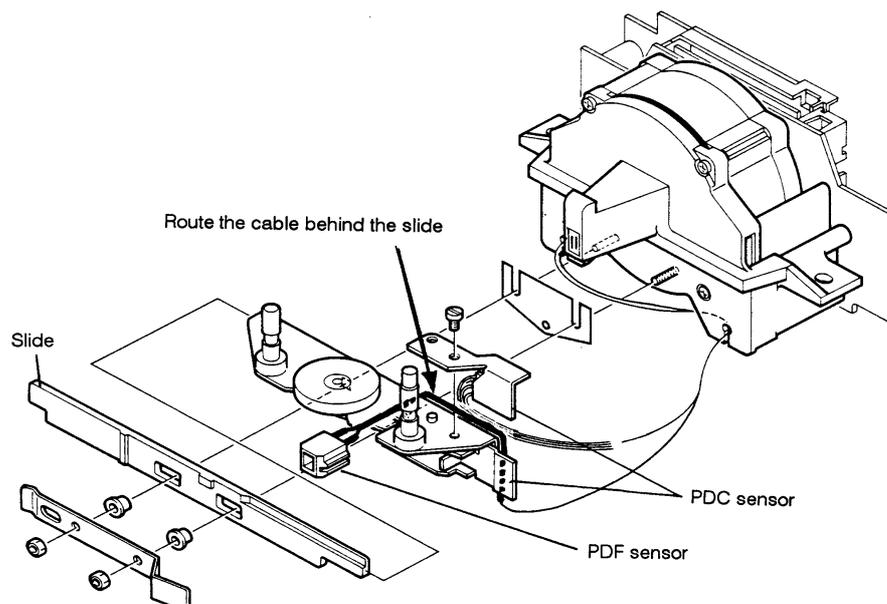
Removing the PDF sensor (the sensor can be removed without dismantling the sensor mechanism as shown in this figure)
